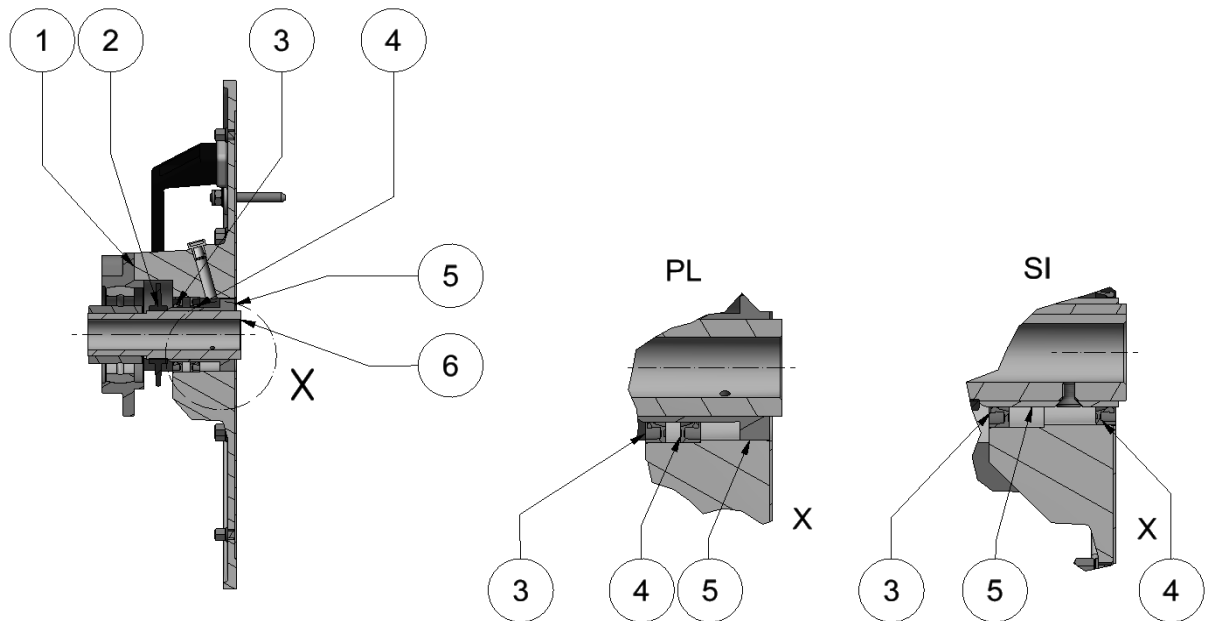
Cover housing: Removing bushing, ejector plate, shaft seal
